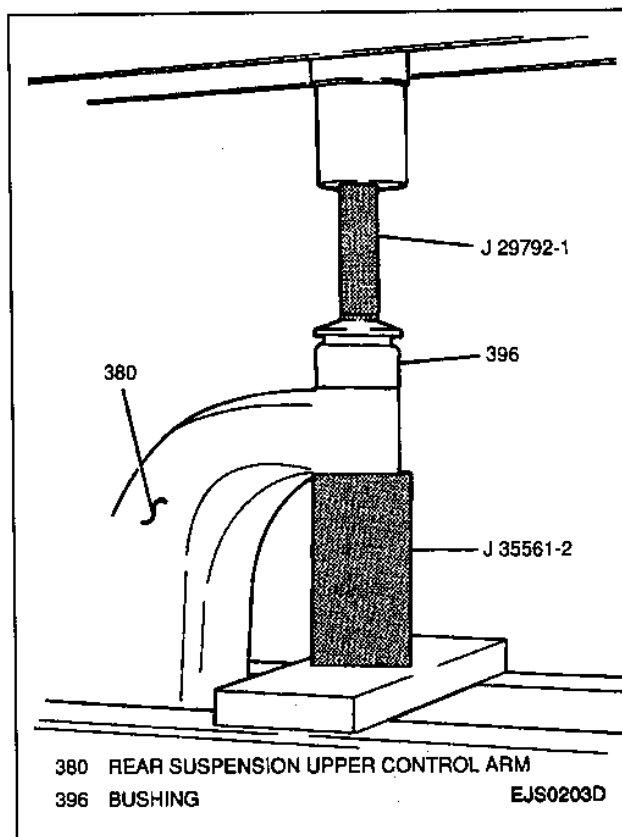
Installing Rear Suspension Upper Control Arm Bushing
